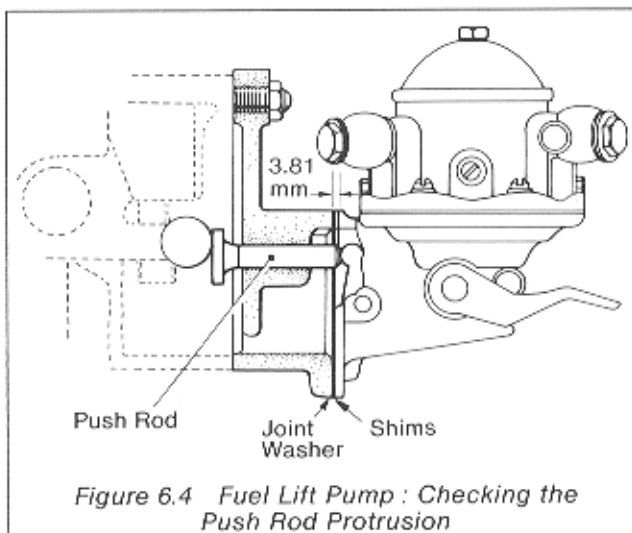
Fuel Lift Pump: Checking the Push Rod Protrusion
